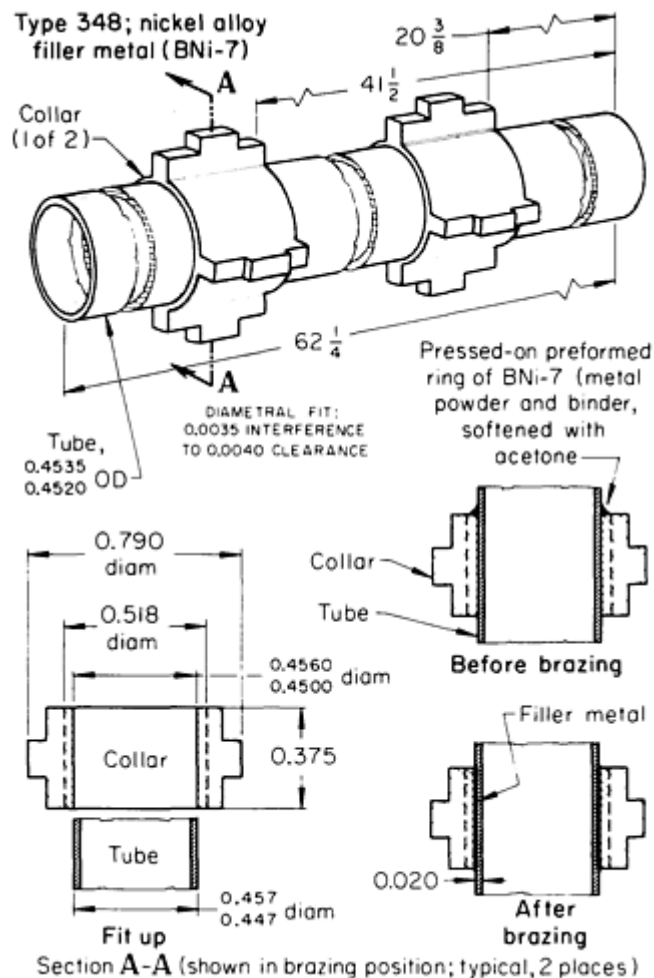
COLLAR AND TUBE ASSEMBLY THAT WAS INDUCTION BRAZED IN VACUUM
